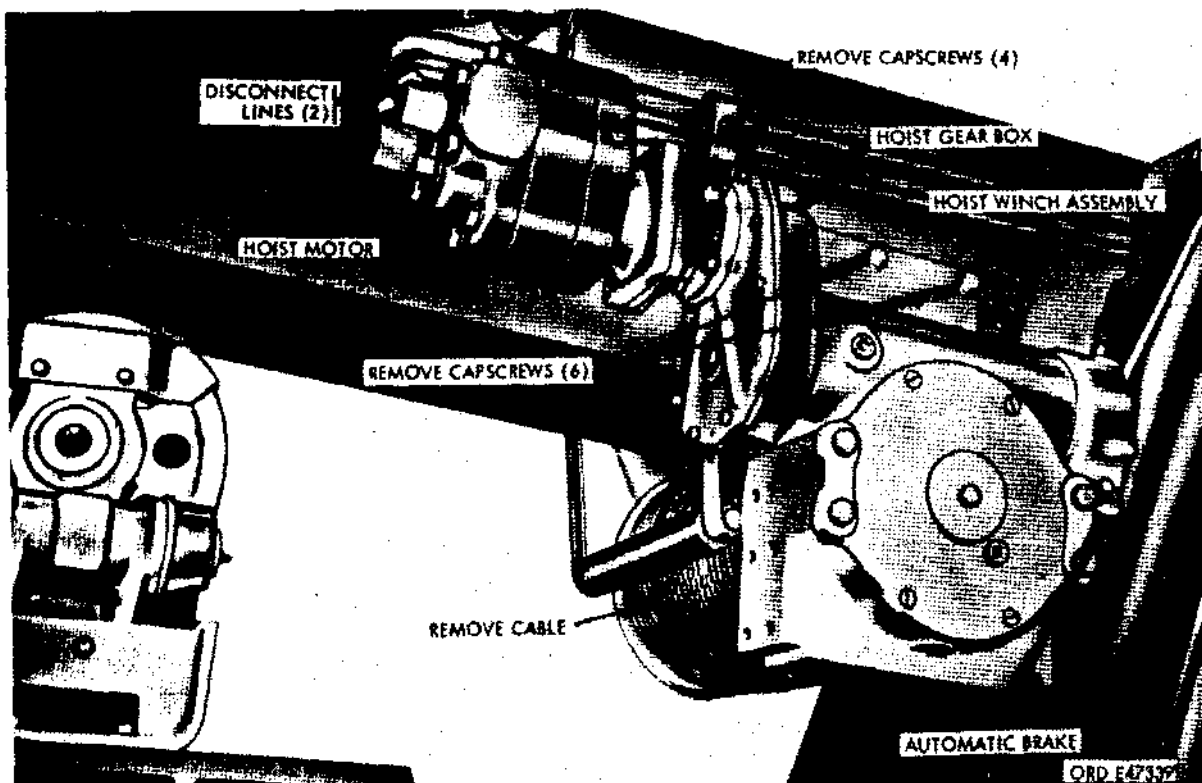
Removing and installing hoist hydraulic motor and hoist winch assembly
